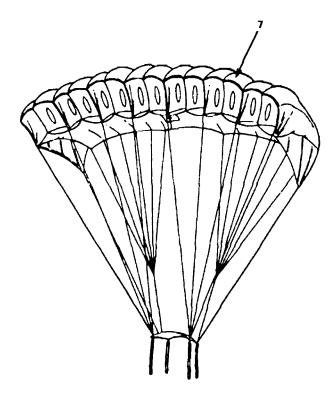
Parachute Assembly (Sheet 2 of 3)
